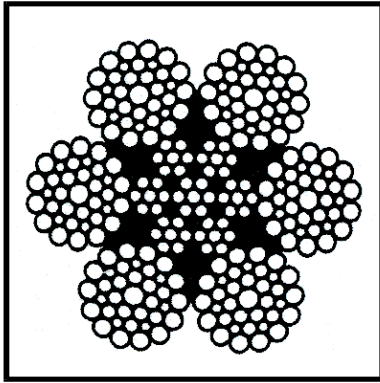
Rope 4 (white), typical 6 strand 32 mm haulage rope with IWRC
